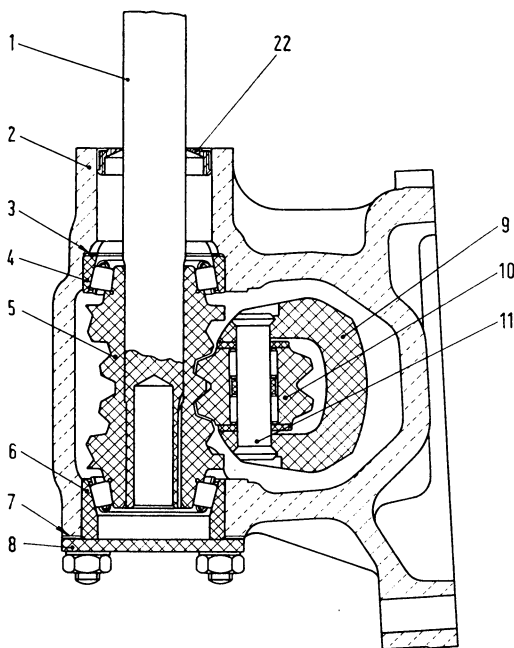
Sectional view of the steering gear across the steering column with worm screw.
